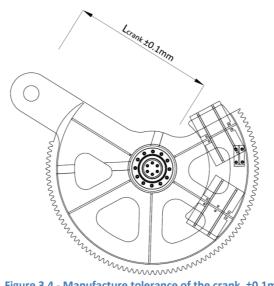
Manufacture tolerance of the crank, $\pm 0.1 \text{mm}$
